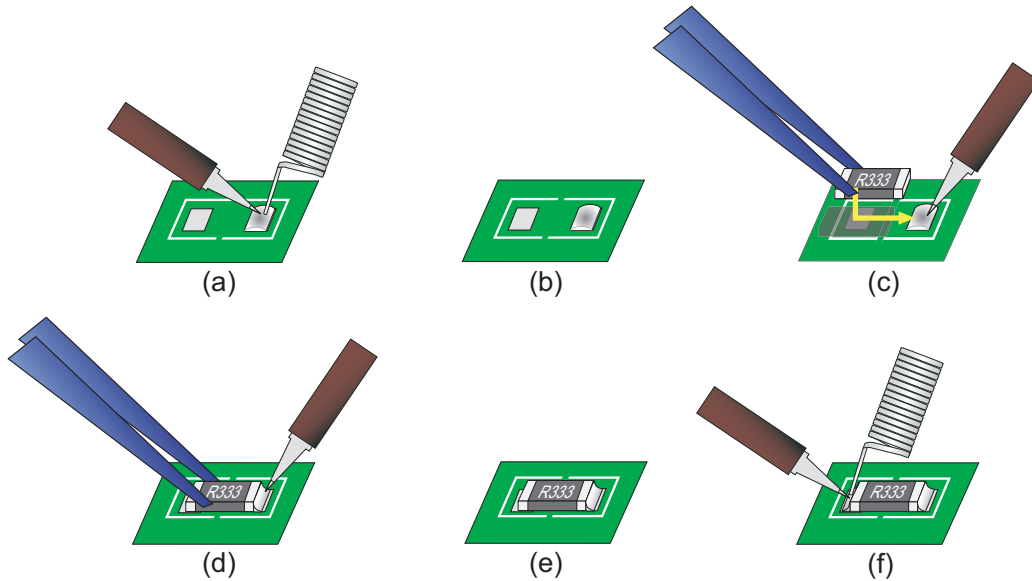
SMT Soldering. When soldering two-terminal SMT devices such as capacitors and resistors, begin by adding solder to just one pad (a, b). Then reflow the solder and slide the component into place (c, d, e). Finally, add solder to the other terminal (f).
